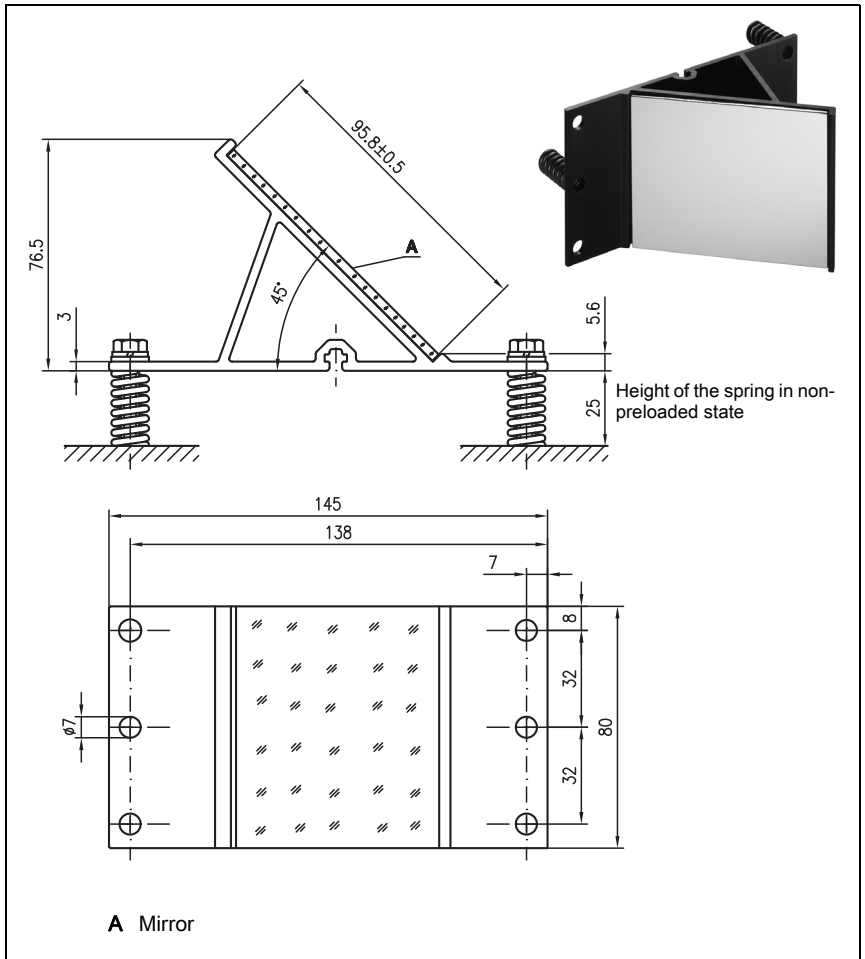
Photo and dimensioned drawing of the US 1 OMS deflector unit
